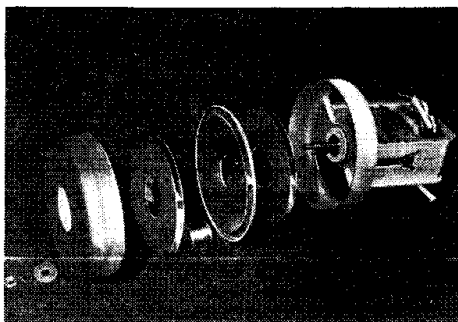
Showing moulded rubber motor mounting ring and baffle
